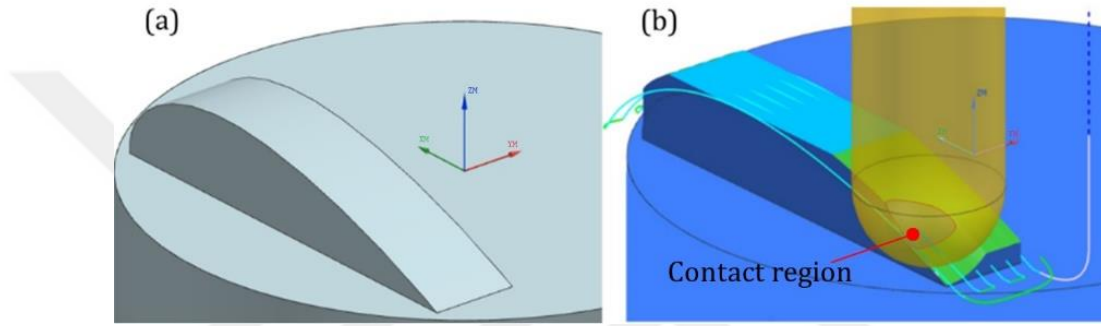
(a) CAD model of the freeform surface, (b) CAM simulation and tool-workpiece contact region.
